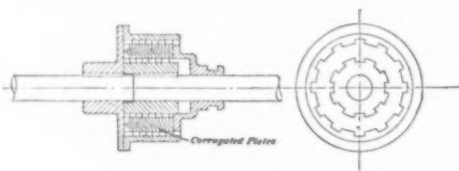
PROF. HELE-SHAW'S CLUTCH.
